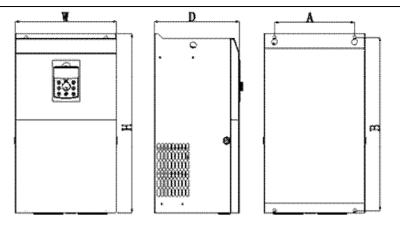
appearance and install dimension of inverter within 45KW~132KW
